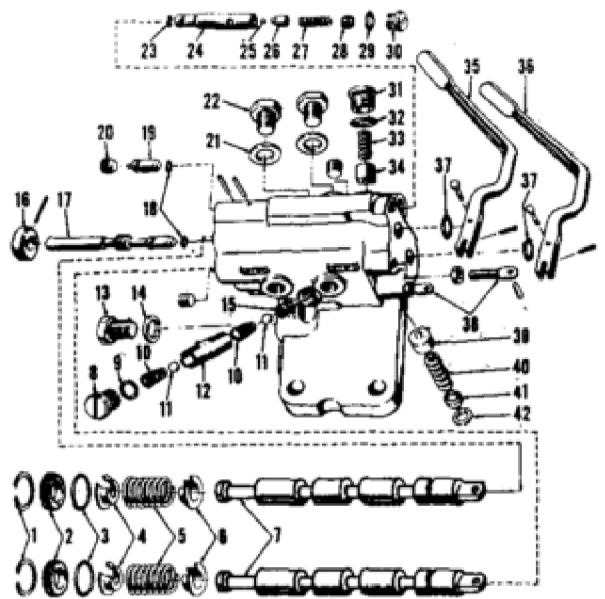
Exploded view of two spool remote control valve assembly with spool detent (34 and 39) mechanism. Refer to Fig. 430 for view of late production detent regulating valve assembly.
